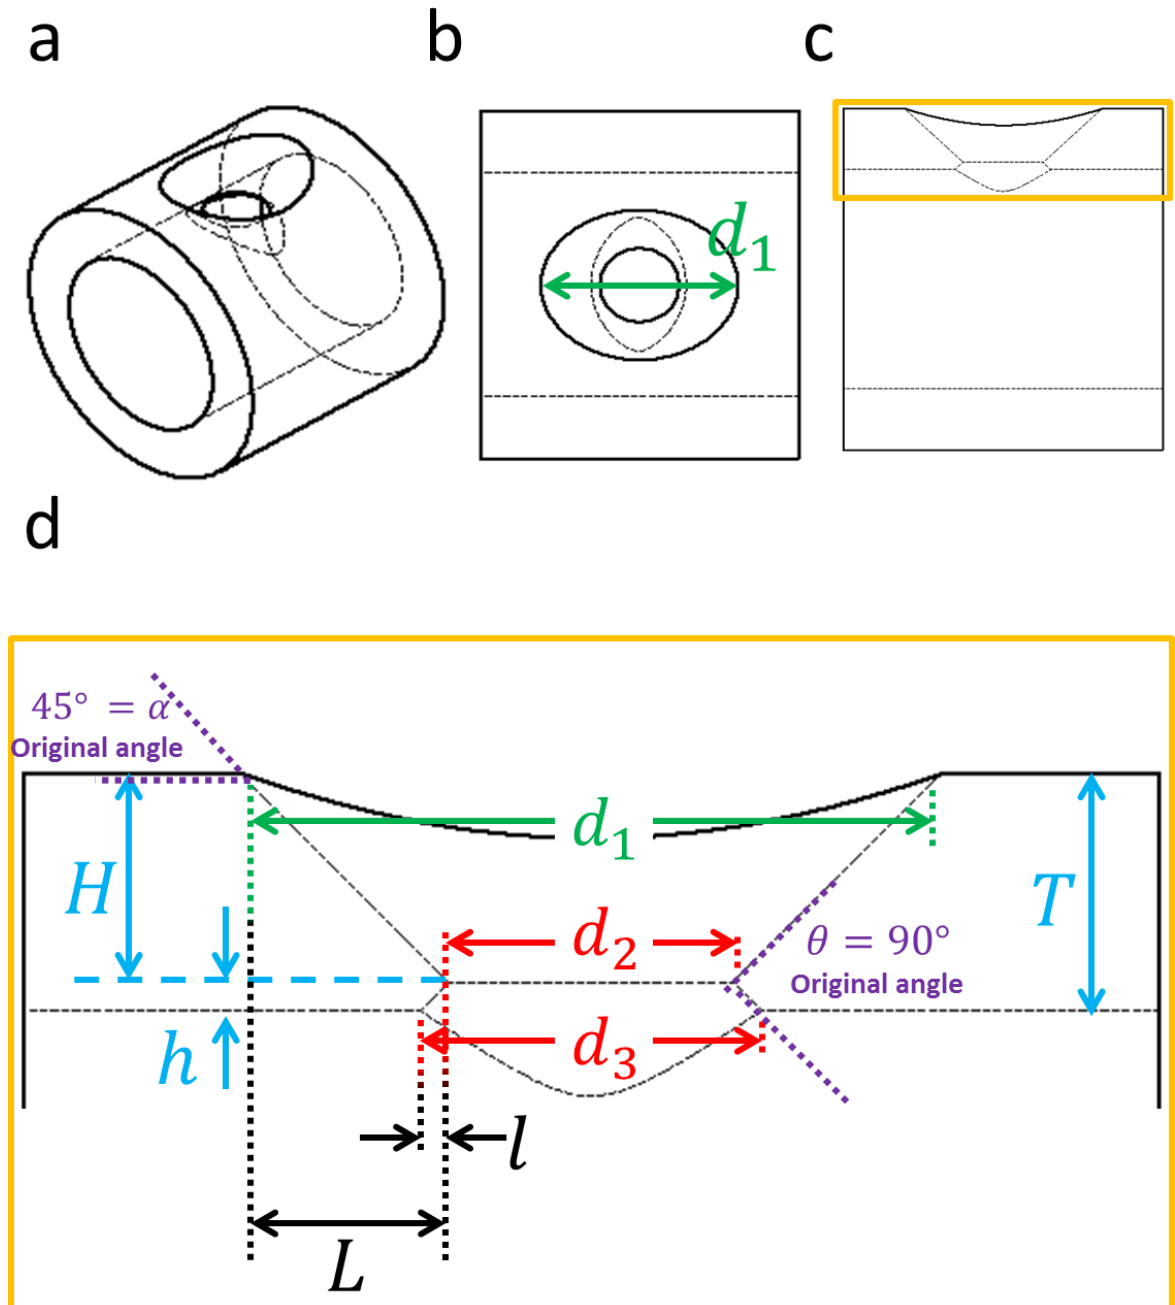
(a) Asymmetric view of the CAD drawing of a segment of the stent containing the generated side-hole shape, created using Inventor® Pro 2018 (Autodesk®, USA). (b) A top view of the fabricated side-hole, with an elliptical outlet, and with the major axis of the ellipses labelled in green. (c) Side view of the side-hole, with the corresponding zoomed-in view shown in (d). Labels indicate both inner and outer portions of the hole, and their corresponding thickness resulting from the cutting ( $H$  and  $h$ ), the total wall thickness ( $T$ ), and the axes of the elliptical major arms ( $d_1$ ,  $d_2$ ,  $d_3$ ) taken at different depths along the side-hole. Both cutting ( $\alpha$ ) and vertex ( $\theta$ ) angles are also reported, together with their nominal values.
